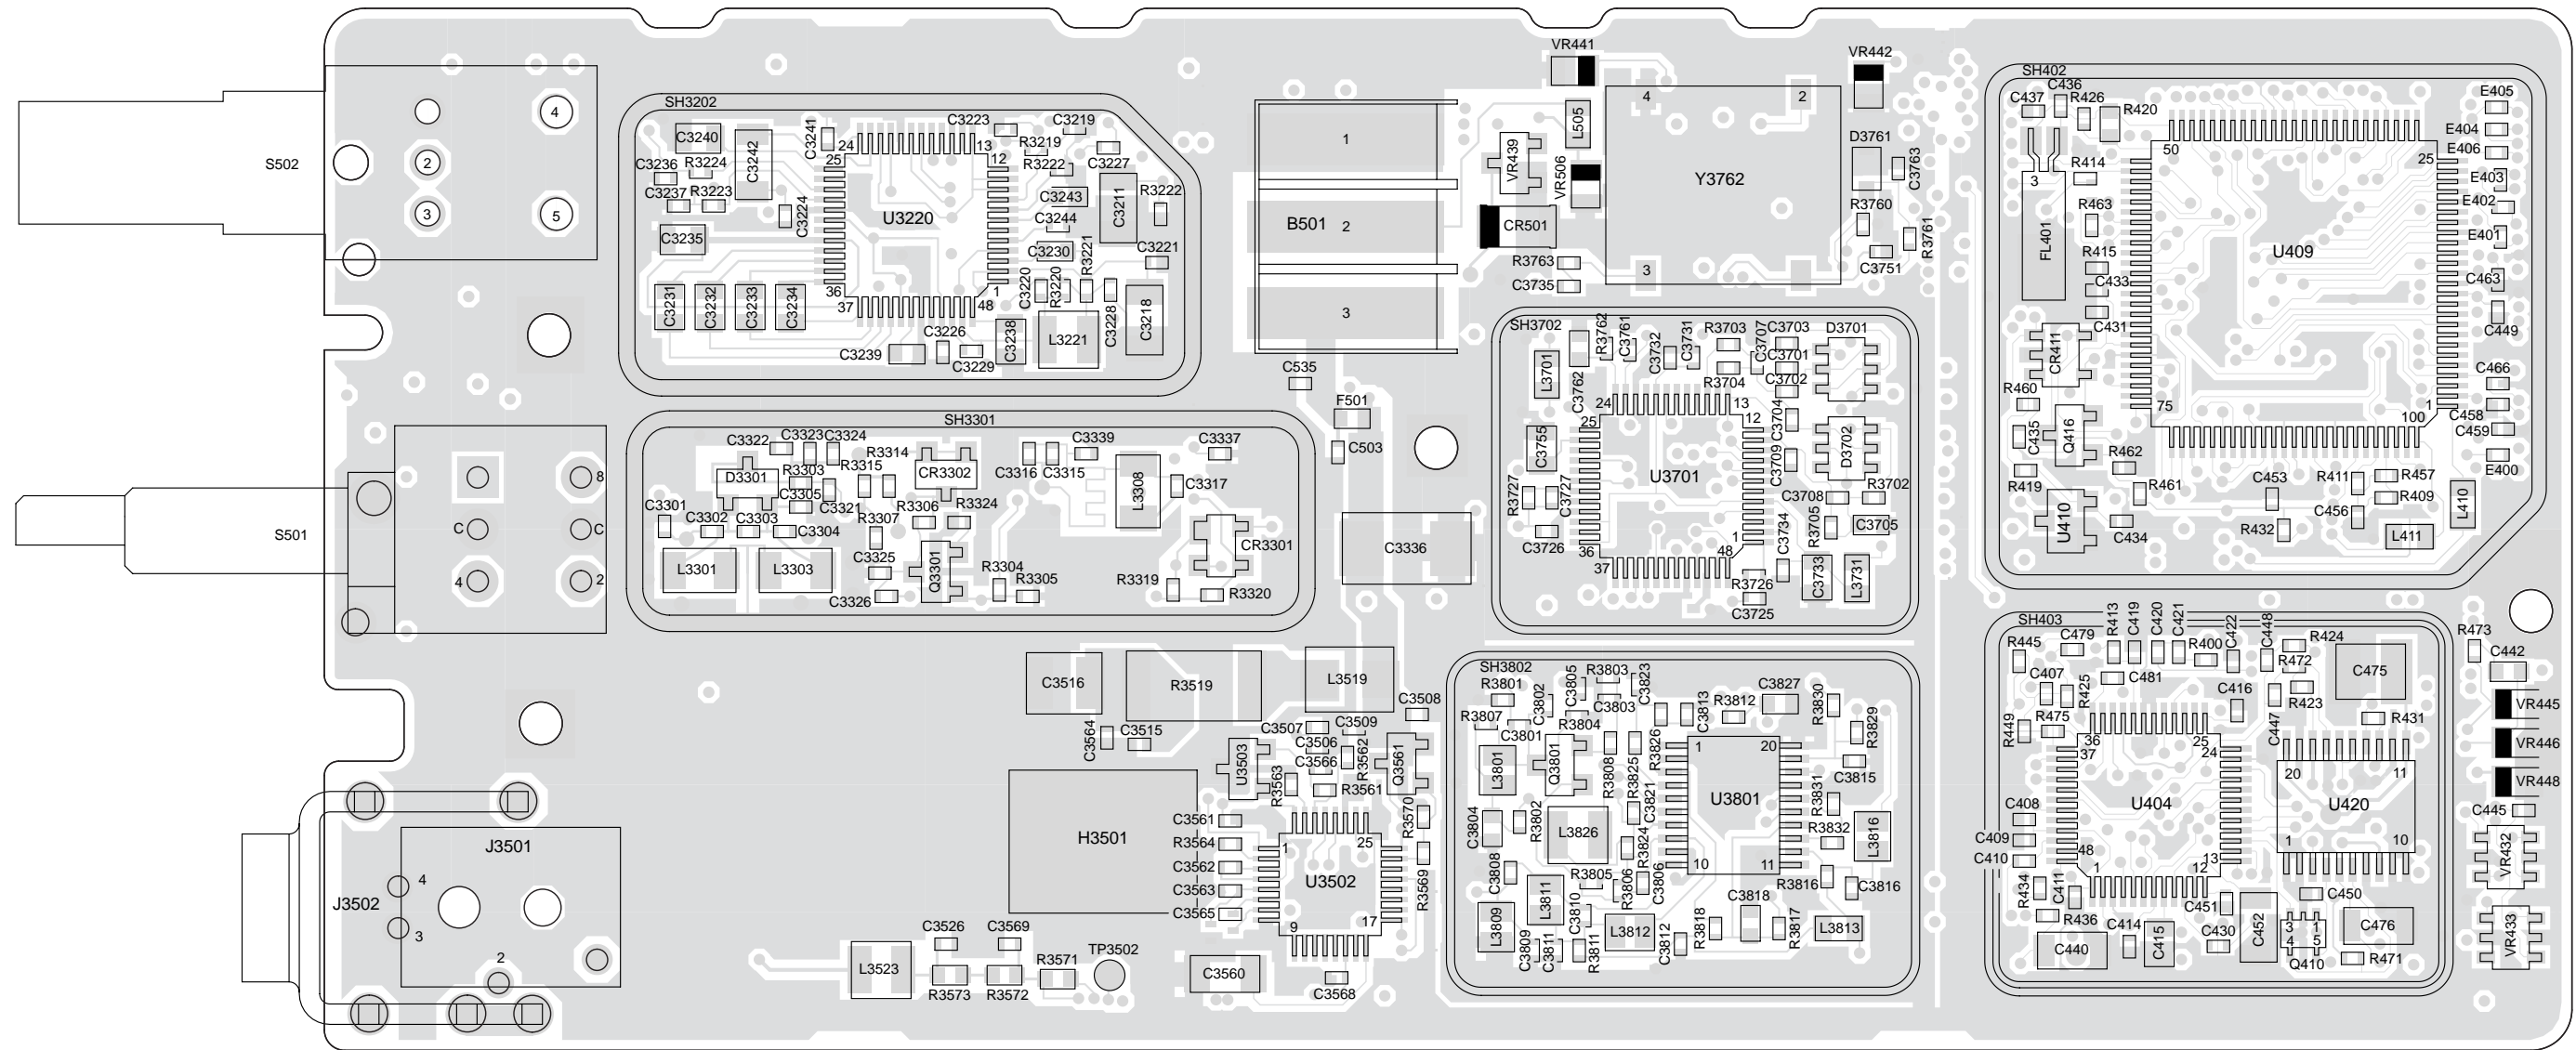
VHF (136-174 MHz) Main Board Bottom Side PCB 8486062B09
